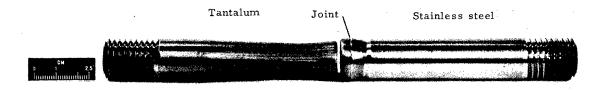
Tensile specimen number 1. Flat sheet bimetallic joint.
